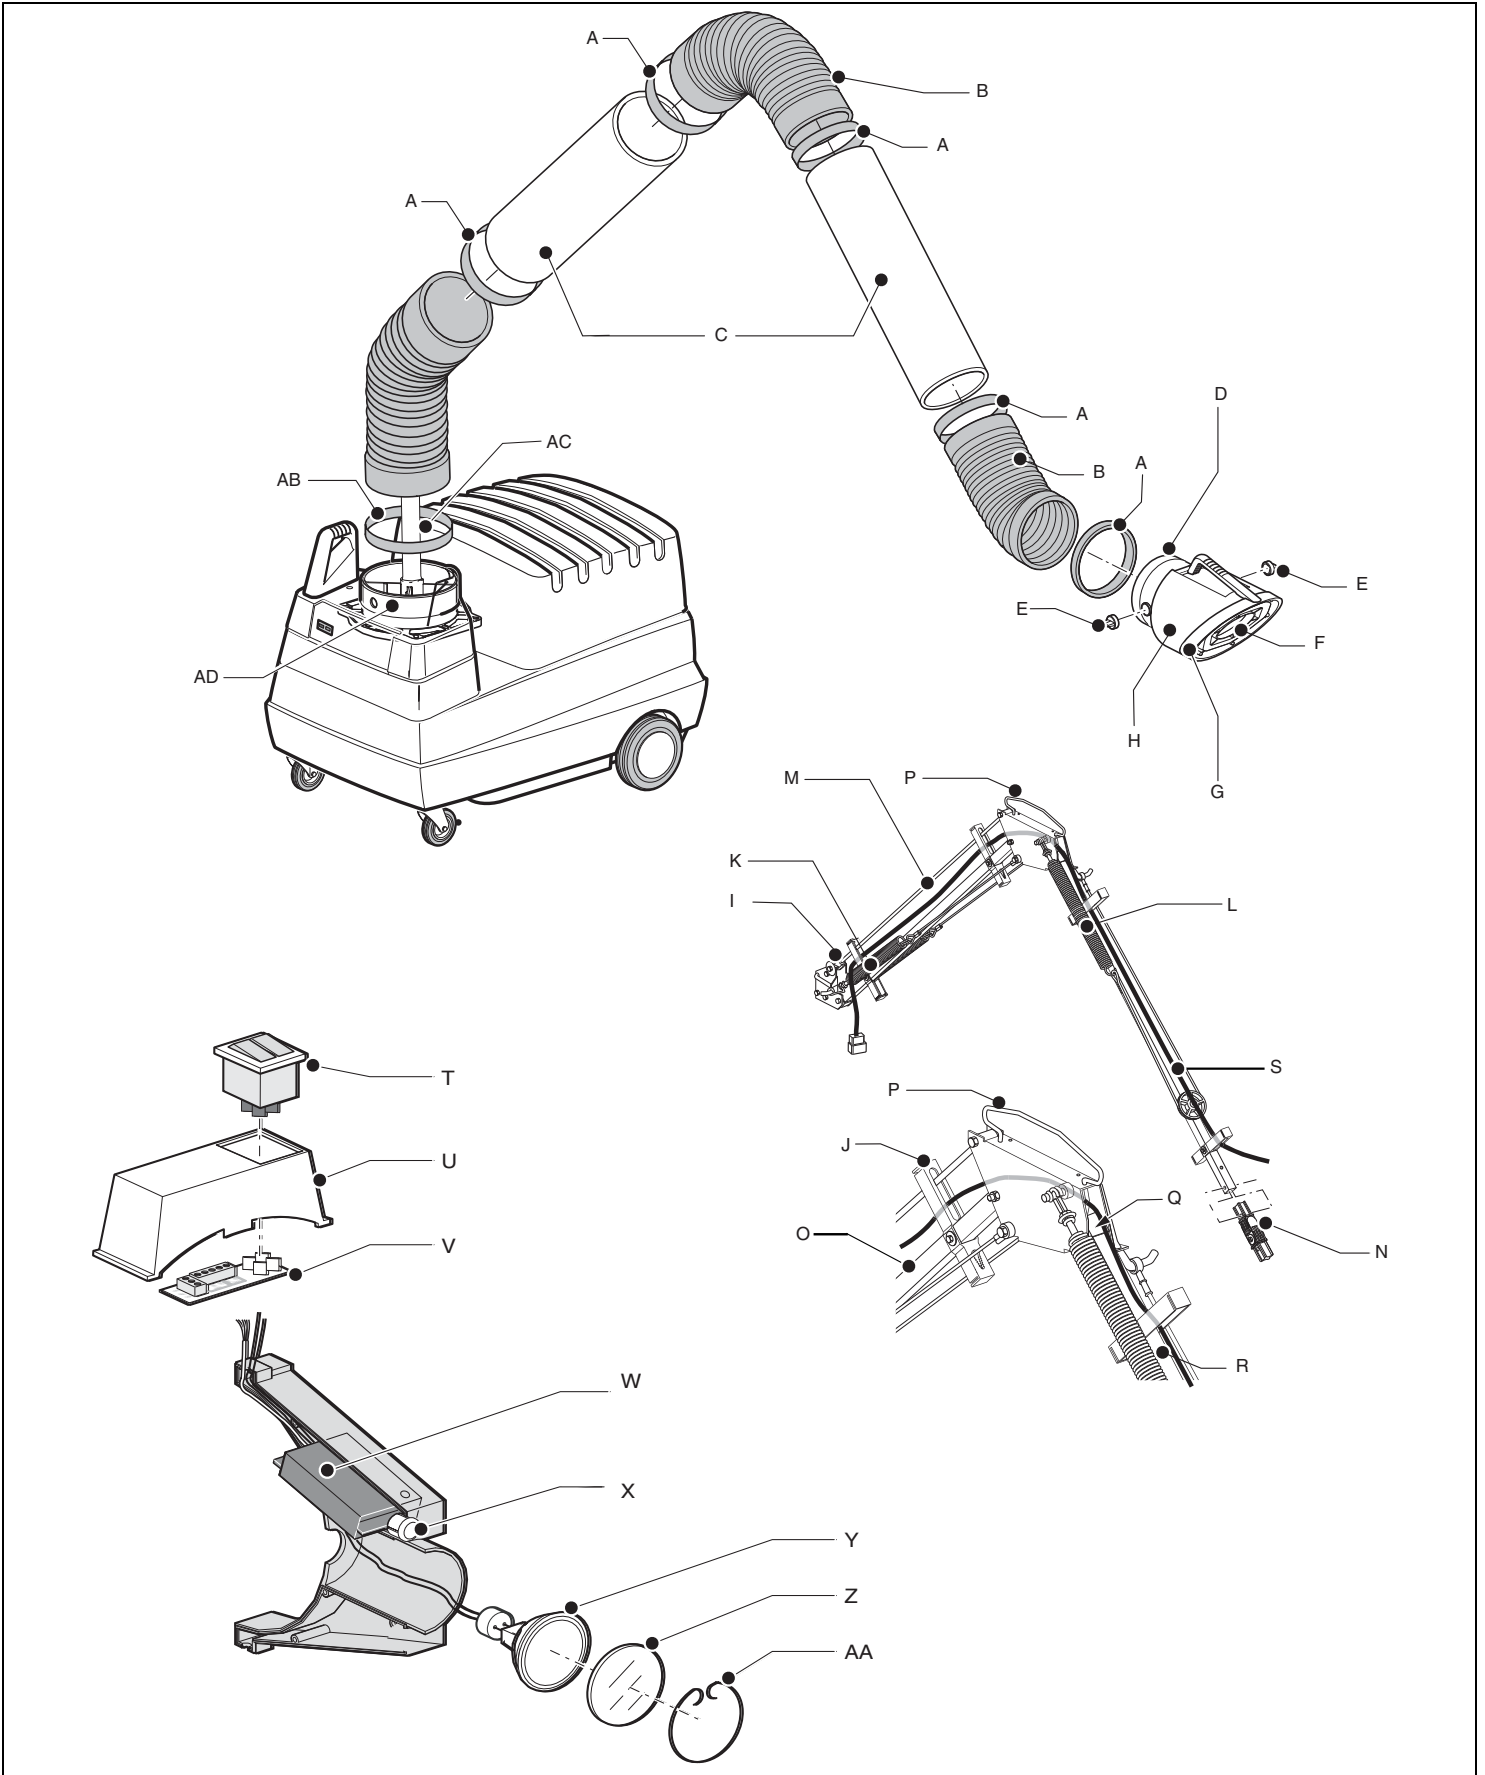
Exploded view LFA 3.1/4.1 Mobile Manual/Automatic
